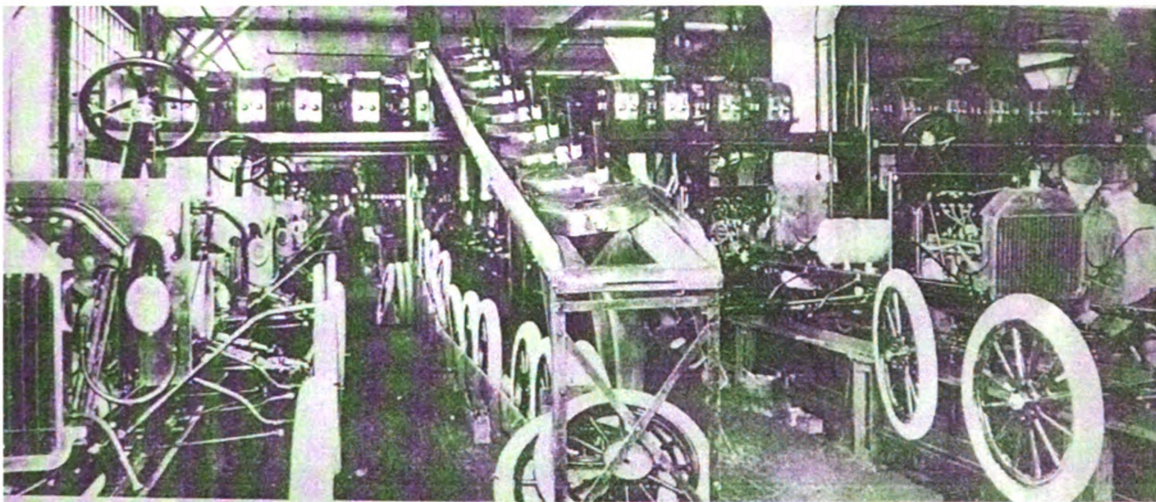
Photo of the Model T chassis assembly line taken in 1914.¹³
